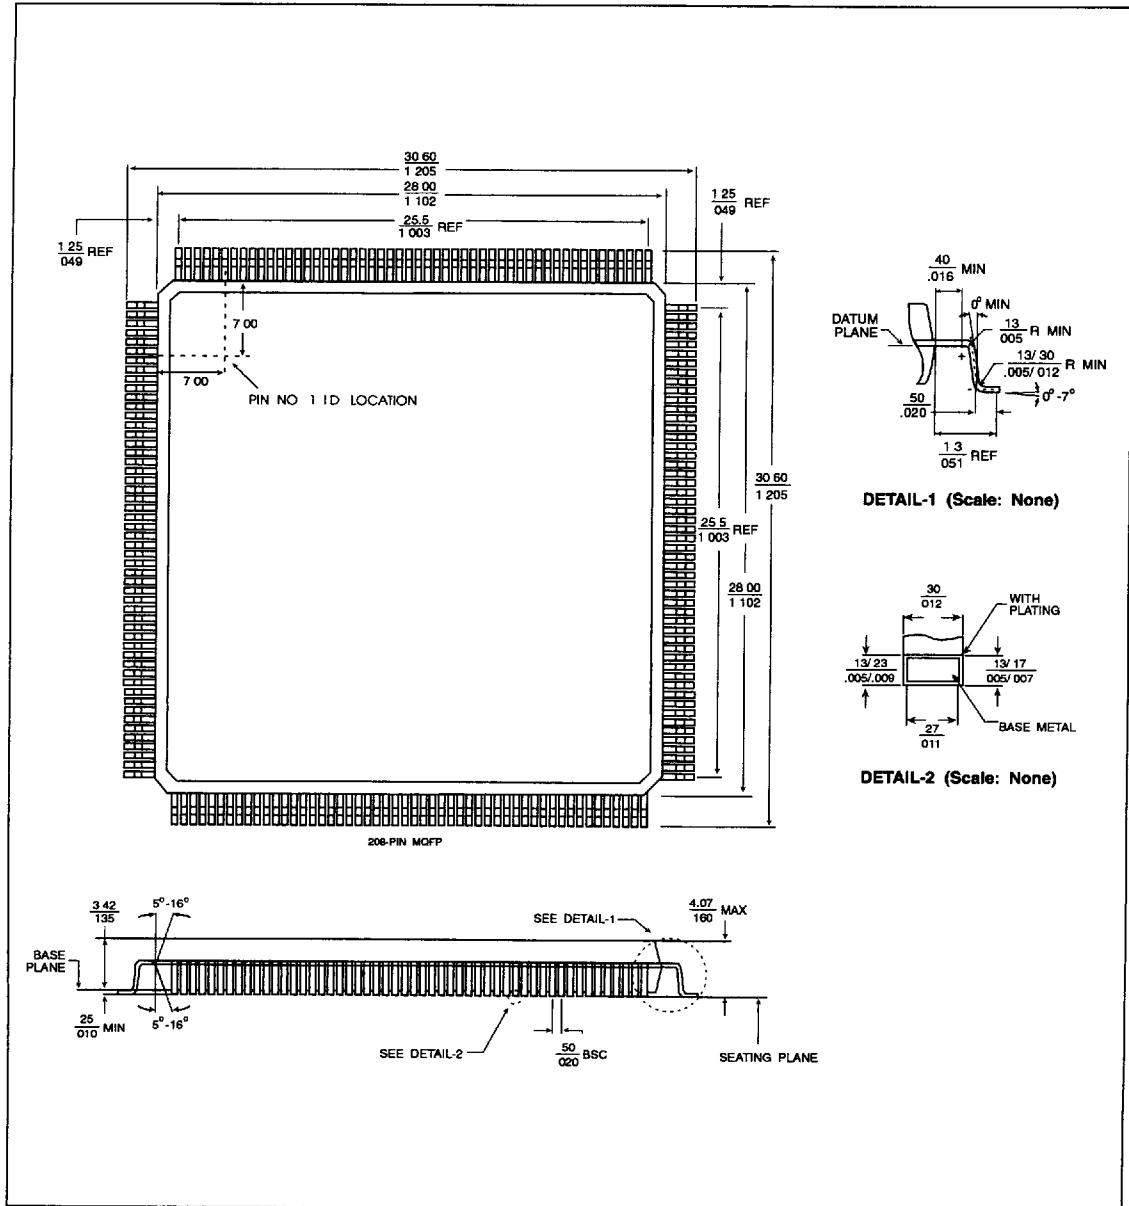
208-PIN MQFP PACKAGE DIMENSIONS
